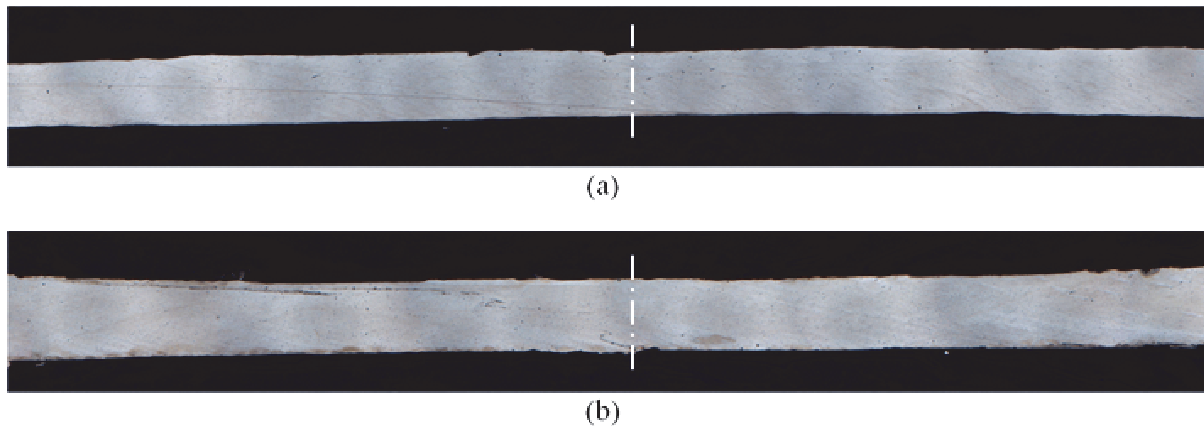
Macrostructure in the cross-section perpendicular to the welding line of FSWed joint obtained at 2000 rpm and 30 mm/min with (a) “pinless” and (b) “pin” tool configurations
